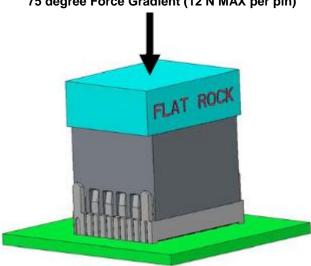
Vertical Connector and Insertion Tool Placed Onto PCB
